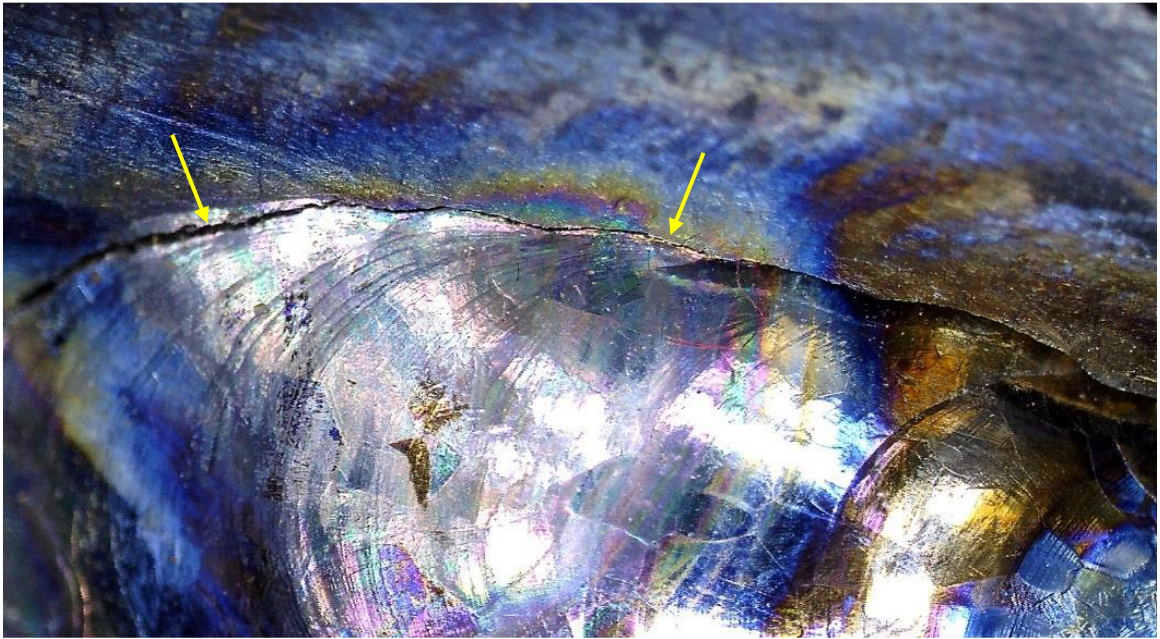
Magnified view of the toe area of the weld showing the toe crack following the weld profile. Note the extensive discolouration that extends well onto the duct material.
